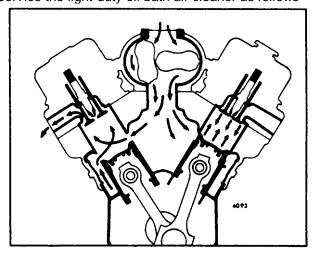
· Air Intake System Through Blower and Engine (6V-53 Engine)
